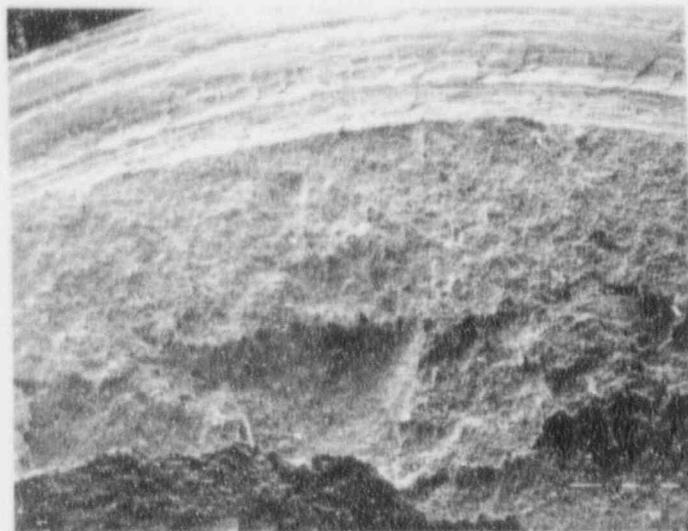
A SEM photograph of cracked bolt 3, illustrating the fatigue fracture, at 50 X magnification.
